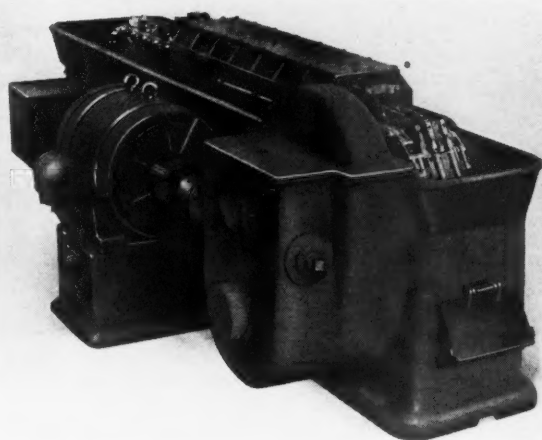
The Drive to the Fixture Chain is through Worm and Helical Gearing and a Sprocket
